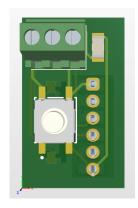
3D1 PCB 5: Communications Periphery Board
